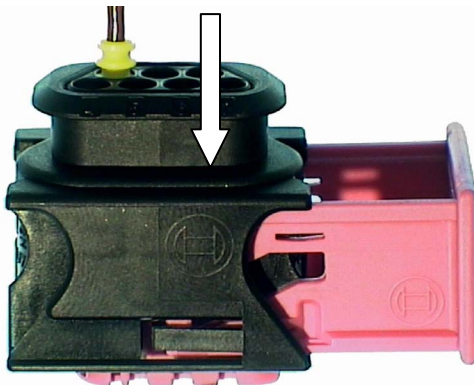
Terminal Assembly (Female Connector 7-way with slider)
